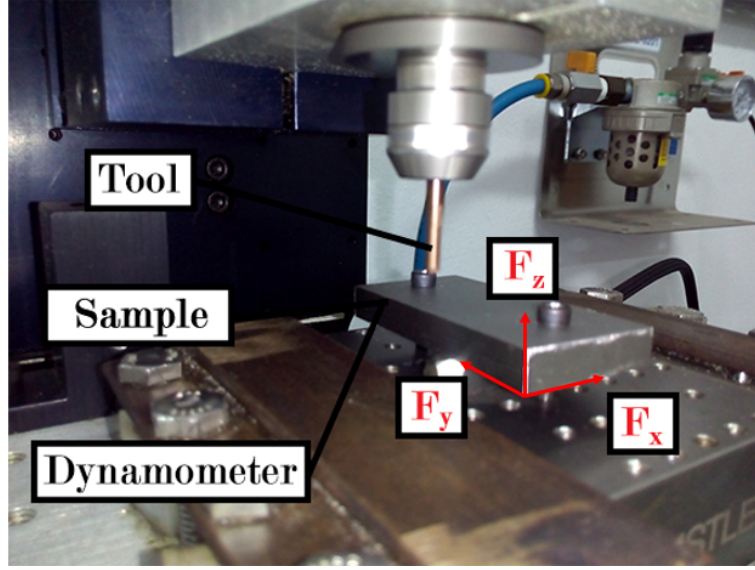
Tool, workpiece and the dynamometer: experimental setup.
